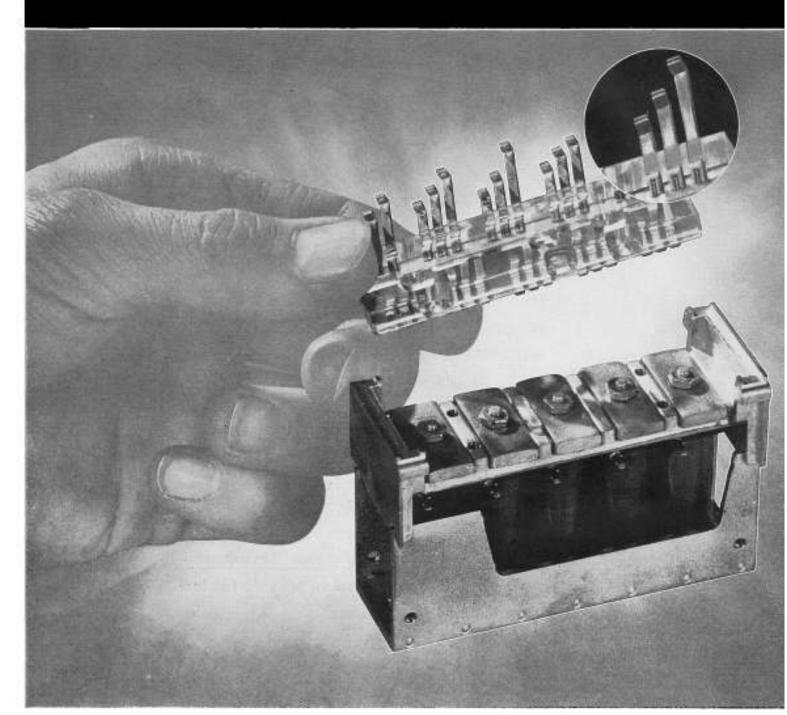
PHOTO SHOWS SIDE PLATE OF FRAME CUT AWAY
